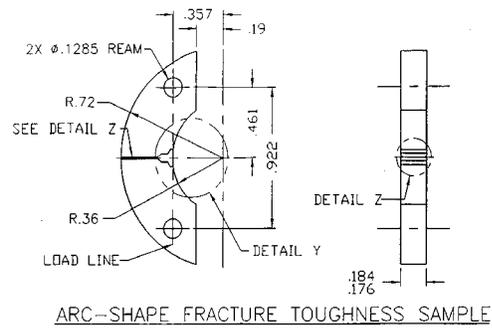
Shape and Dimensions of Fracture Toughness Sample.
